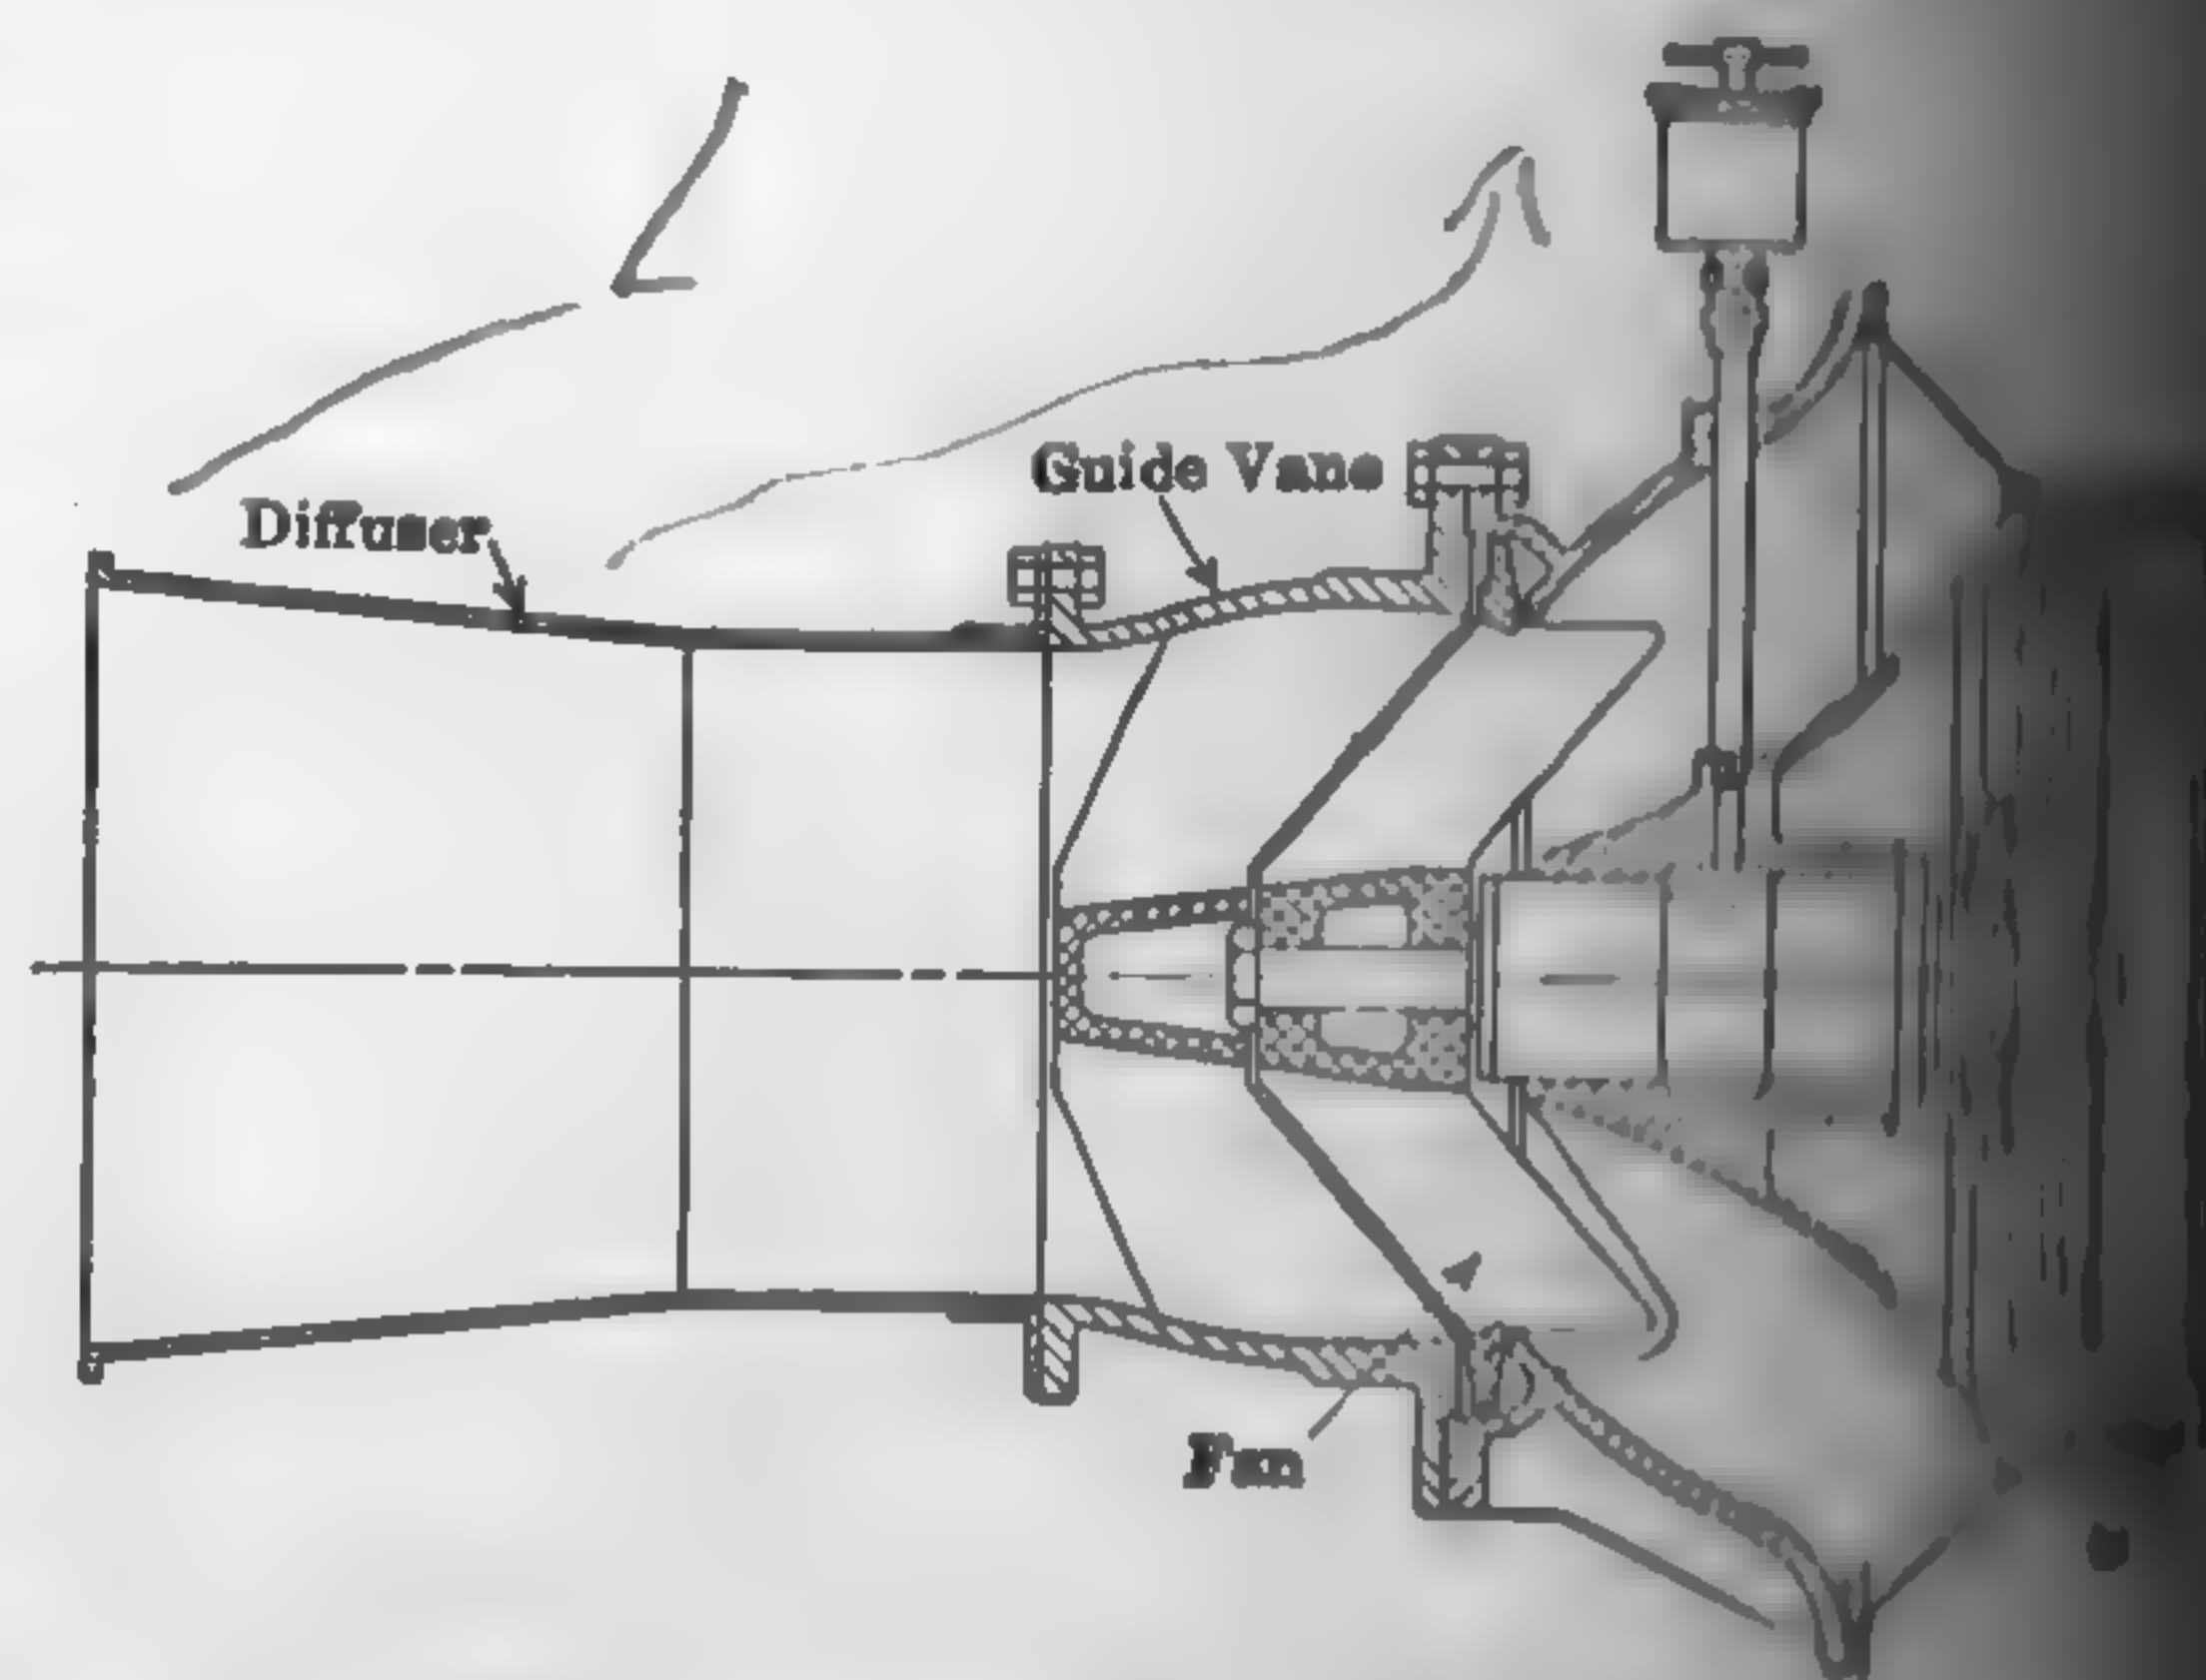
Sectional View of Turbine-driven "Vano" Blower.
